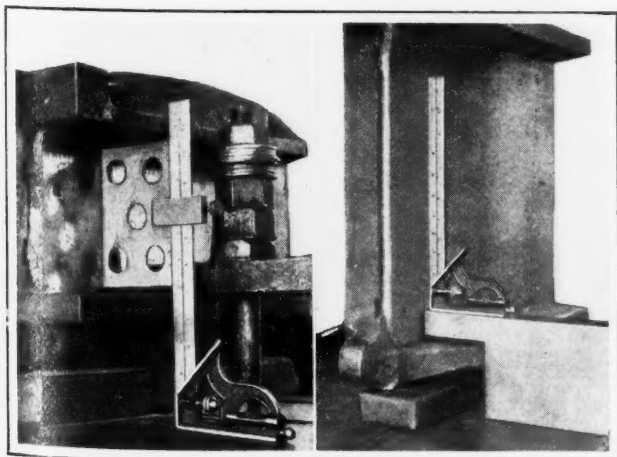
Two Methods of Checking Position of Driving-box Relative to Machine Table
